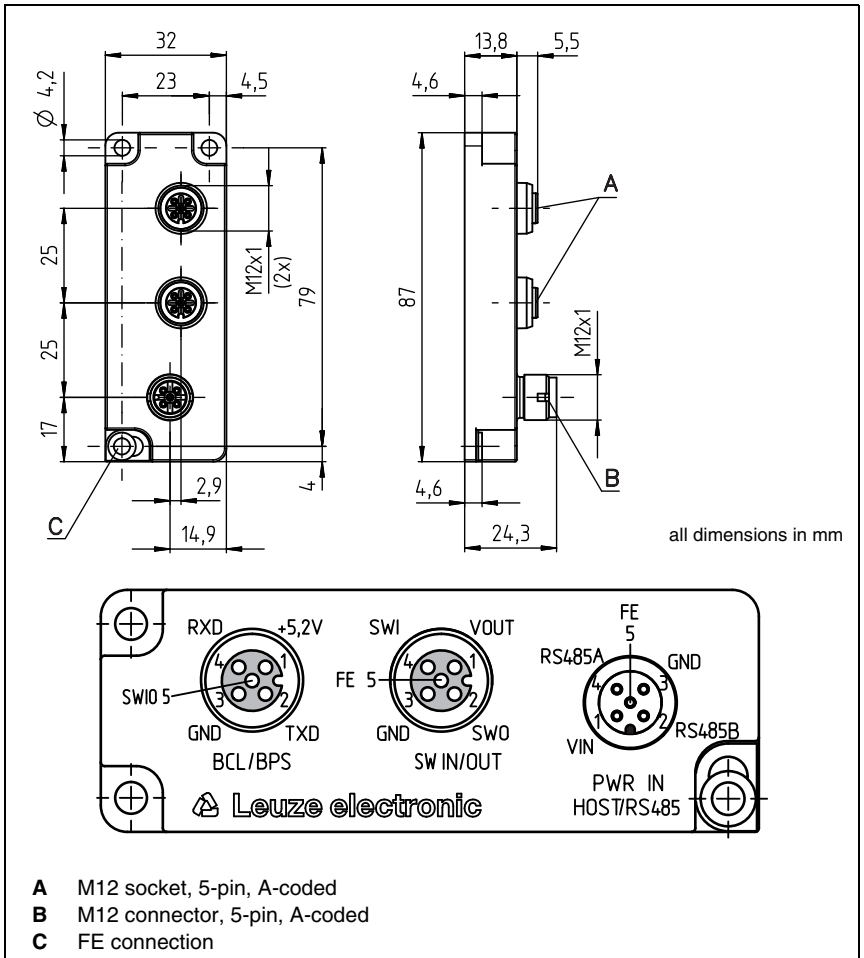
Dimensioned drawing and pin assignment of the MA 8-01/MA 8-02 connection
